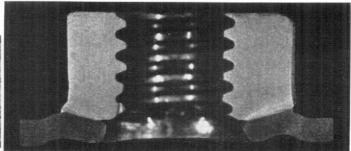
Welded nickel-plated mild steel, showing inadequate mixing.
